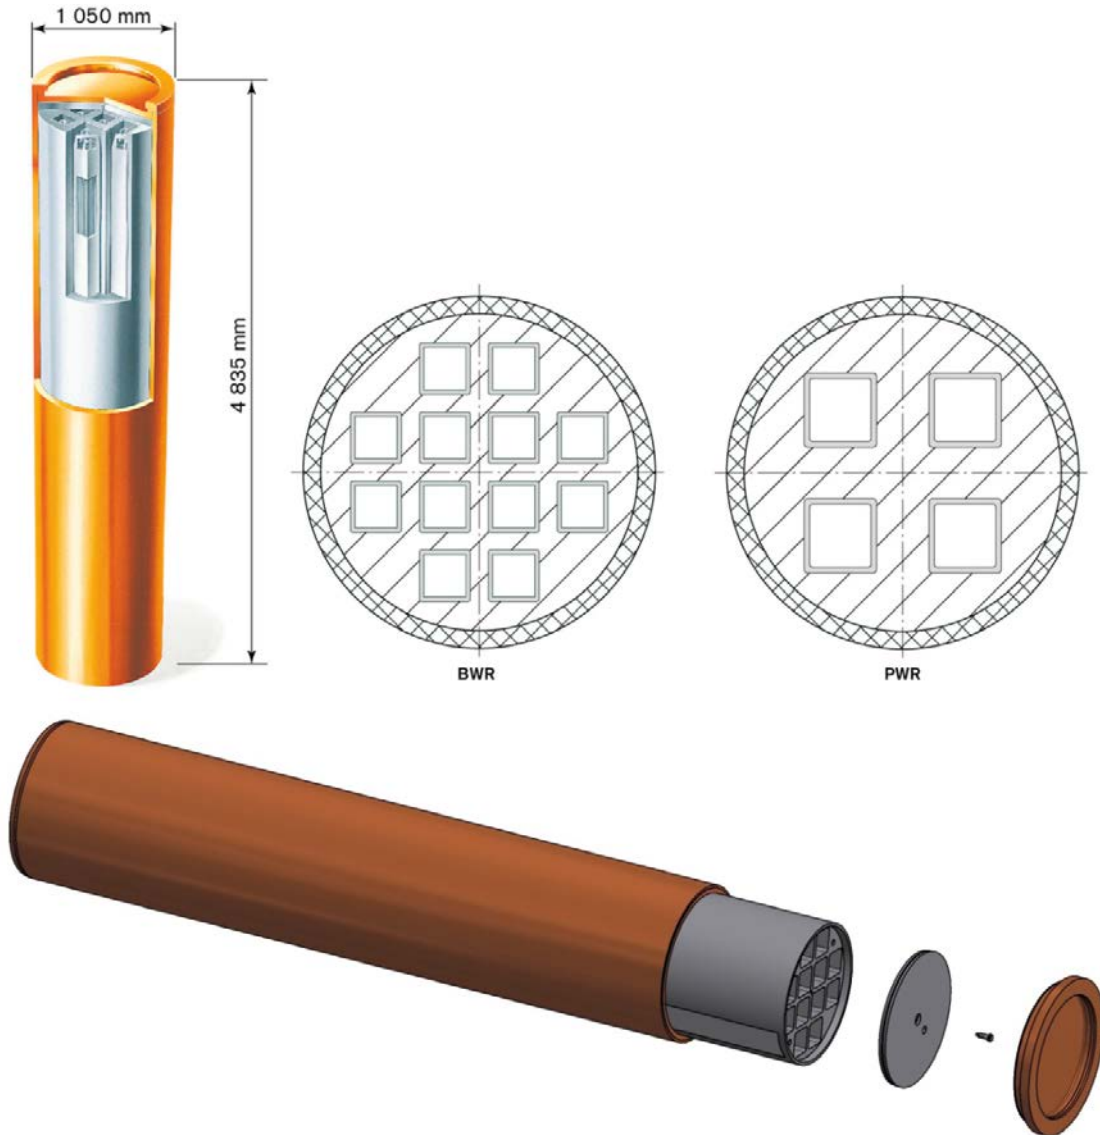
Upper left: Schematic of the general design of the KBS-3 canister showing the insert and copper shell. Upper right: cross section of the BWR insert and the PWR insert. Lower: Schematic exploded view of the canister and its components (from the left: copper tube with a base, insert, steel lid for the insert, screw for the steel lid and copper lid).
